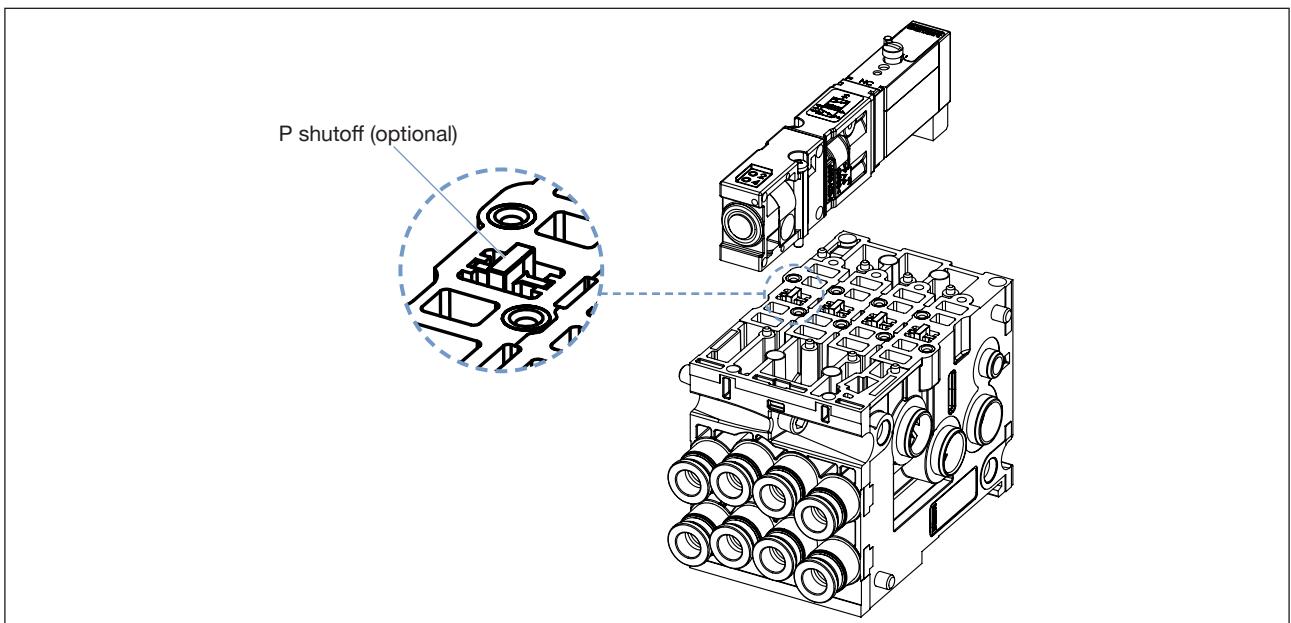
Pneumatics valve block AirLINE Ex, REV.2, Type MP1... (modular pneumatics)
